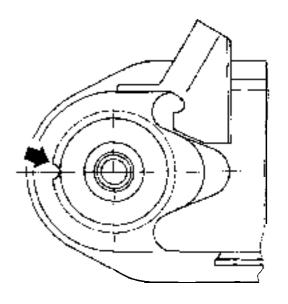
A-18 Lower Ball Joint Notch Opel 1900 • Manta
